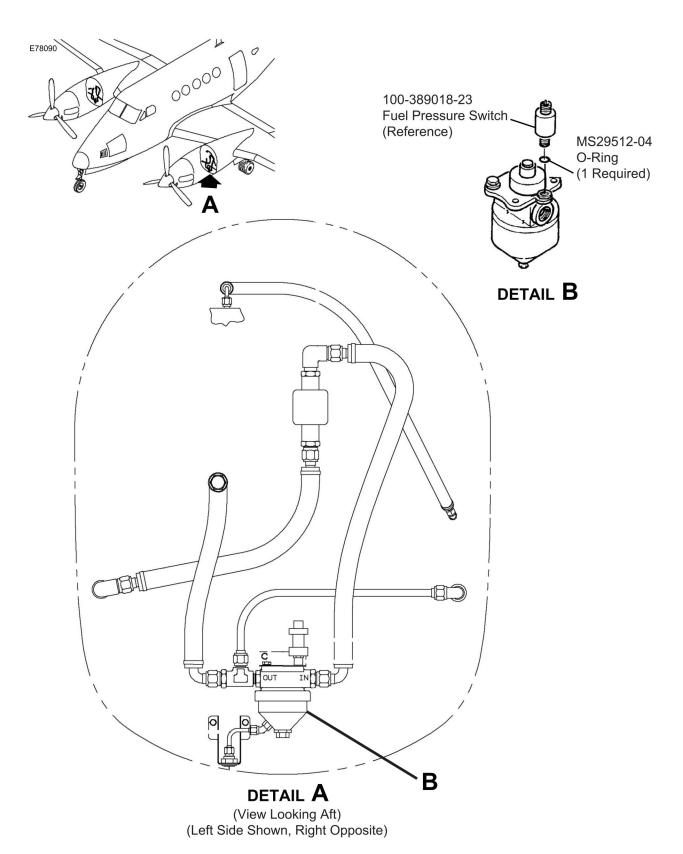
Fuel Pressure Switch O-Ring (Sheet 1)
